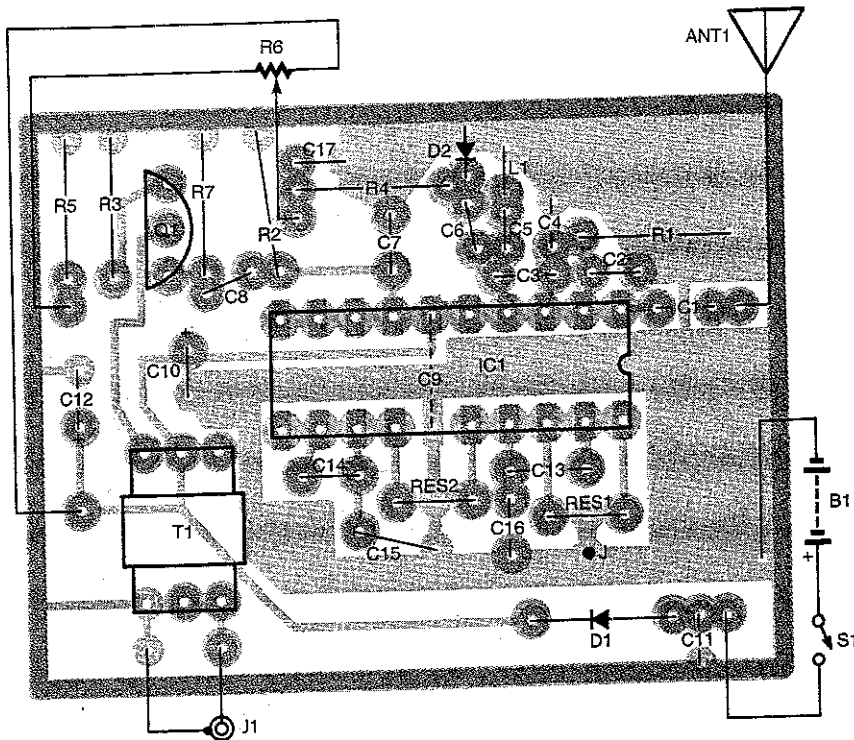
Here's the parts-placement diagram for the Airport Buddy. Note that C9 is tack-soldered to the solder side of the board between the pins of IC1. Keep the body of C9 flat to the board.
